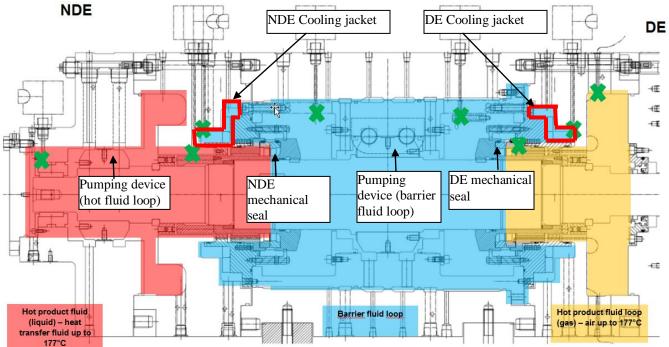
Cross section of test machine used for hot mechanical seal tests. Temperature sensors inside the test machine are highlighted with a green "X".
